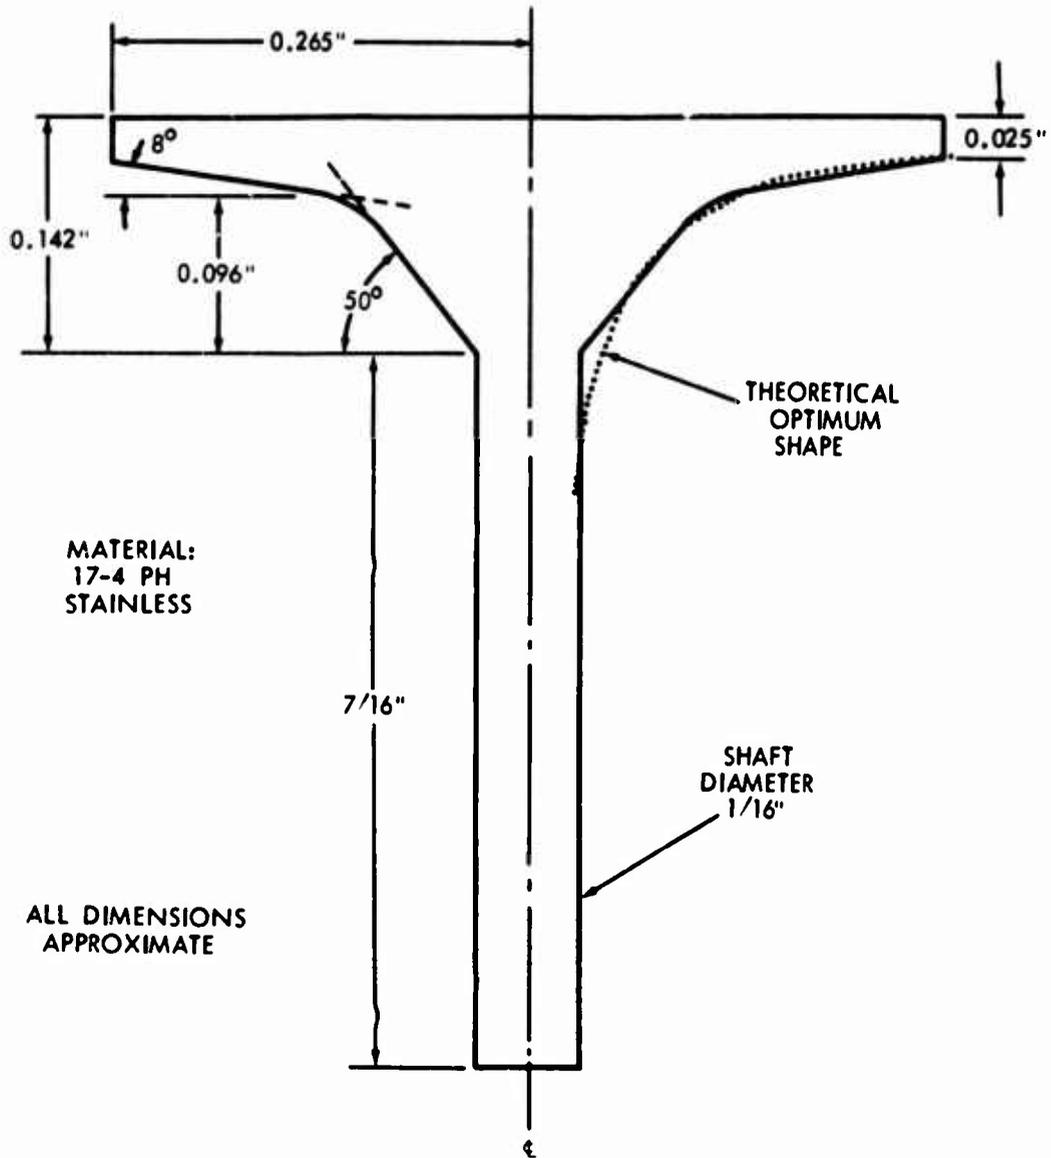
HIGH-SPEED ROTOR CROSS-SECTION
